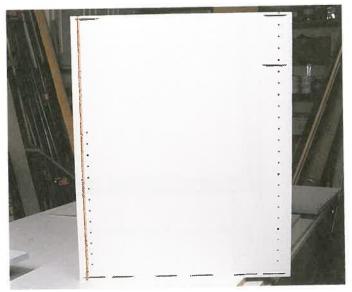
This panel is ready for assembly with plate joinery. (Chuck Davis Cabinets)
